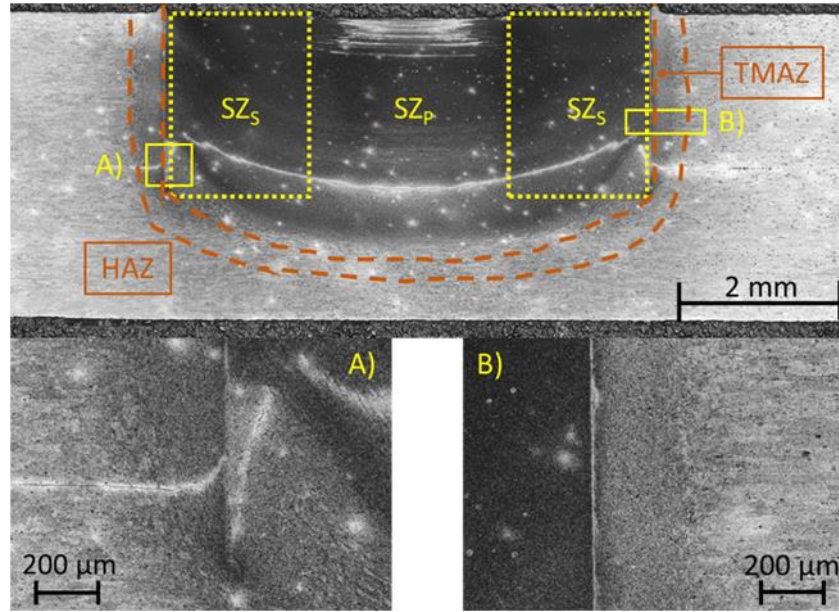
Cross-section of RFSSW AA2024-T3 welding condition W3 (RS = 1000 rev/min; PD = 2.4 mm) with sealant:
